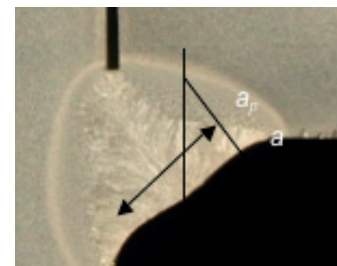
Extra penetration in root side of weld increase the load carrying capacity of the joint
